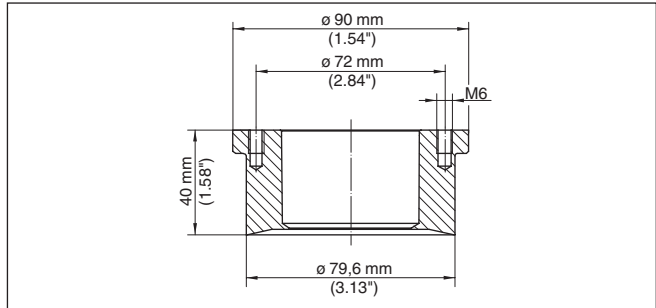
Dimensions of welded socket, hygienic fitting DN 32 with tension flange
